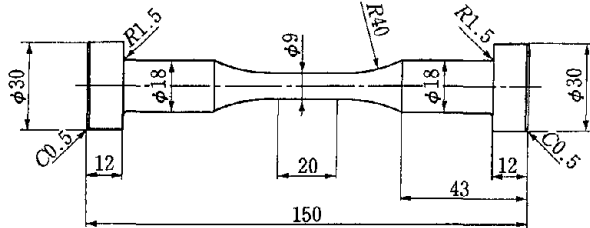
Shape and dimension of tension-compression fatigue specimen (mm) (Tool steel, SKH51).
